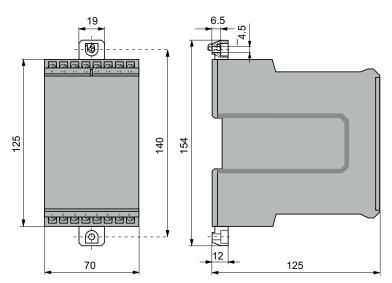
F11 two output in housing E16 with the screw hole brackets pulled out for wall mounting.
